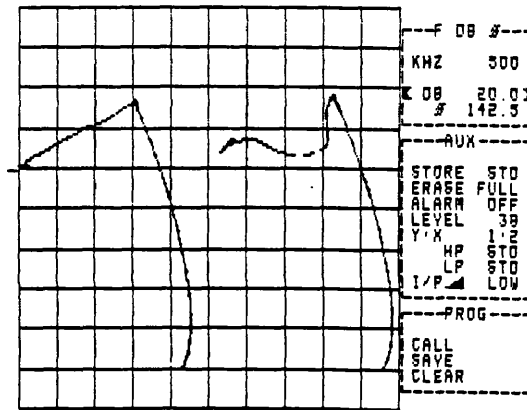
Stainless Steel Weld Specimen 2 - 3.5 mm Long Slit (300 kHz)
